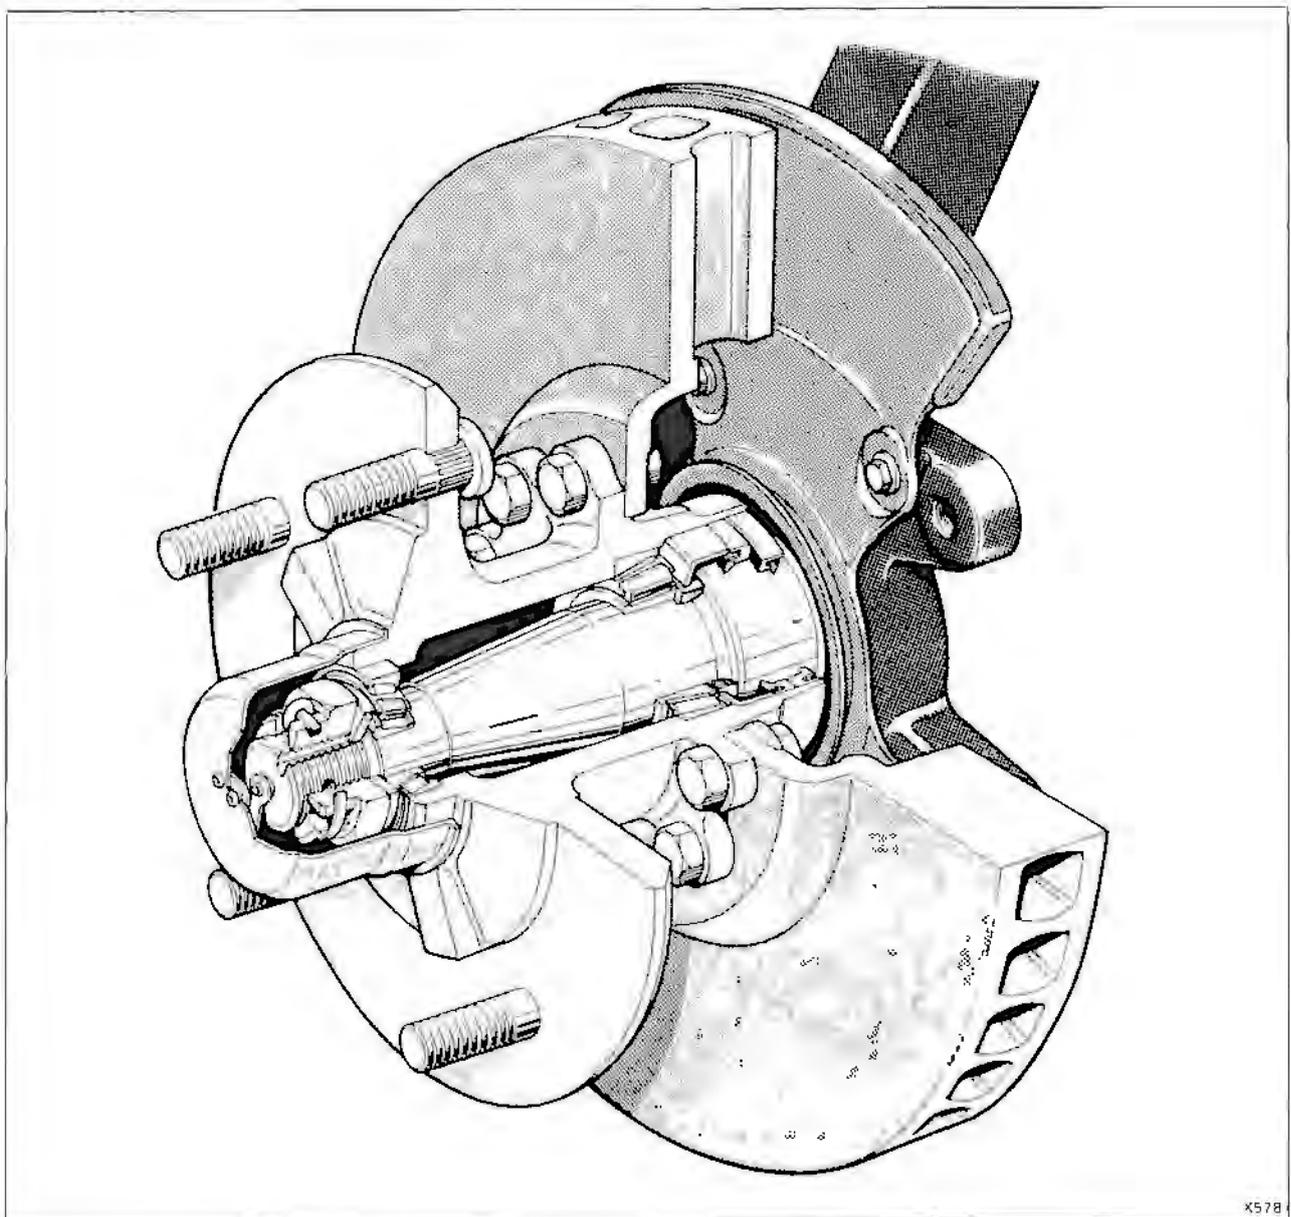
Front hub assembly (Cars not fitted with anti-lock braking)
